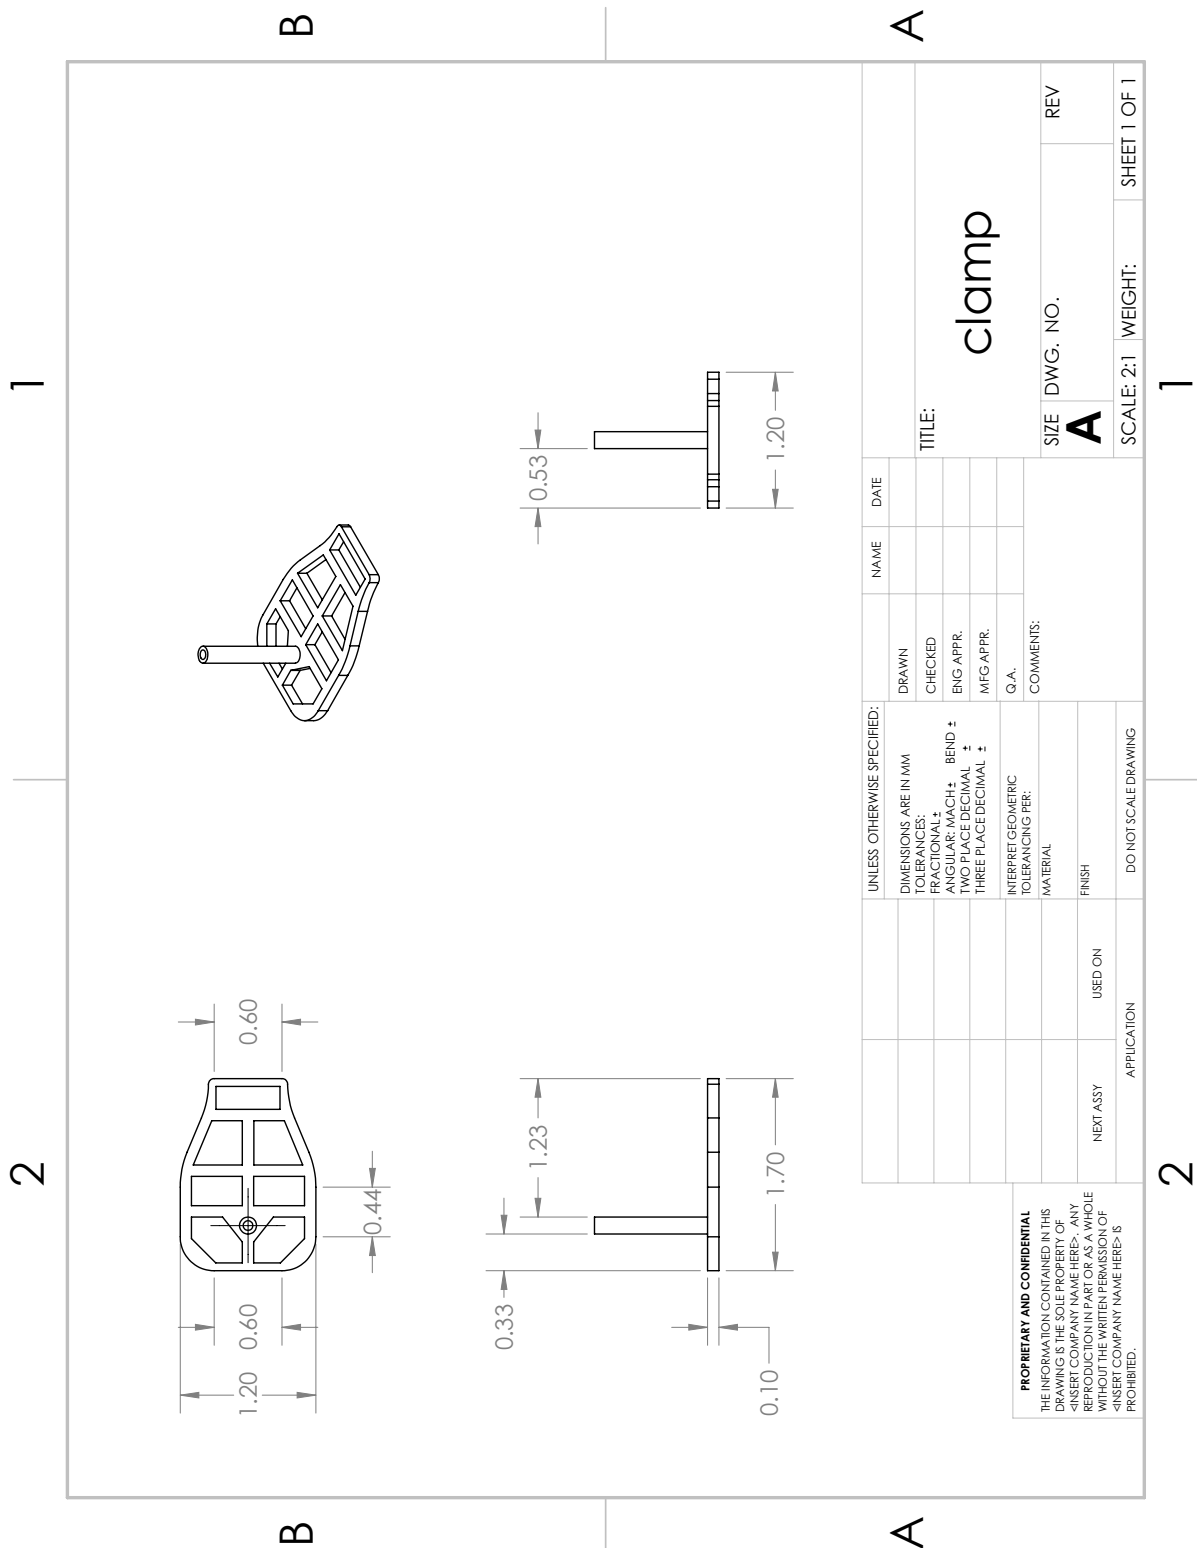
Technical drawing of the inset used to attach the gel to the device.
